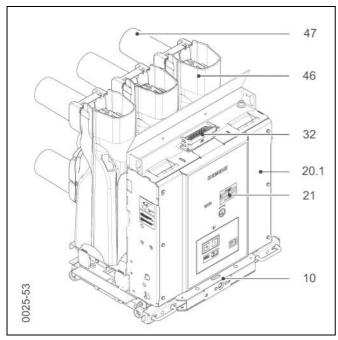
24 kV, 16–25 kA, 2500 A, operating mechanism side with withdrawable part
